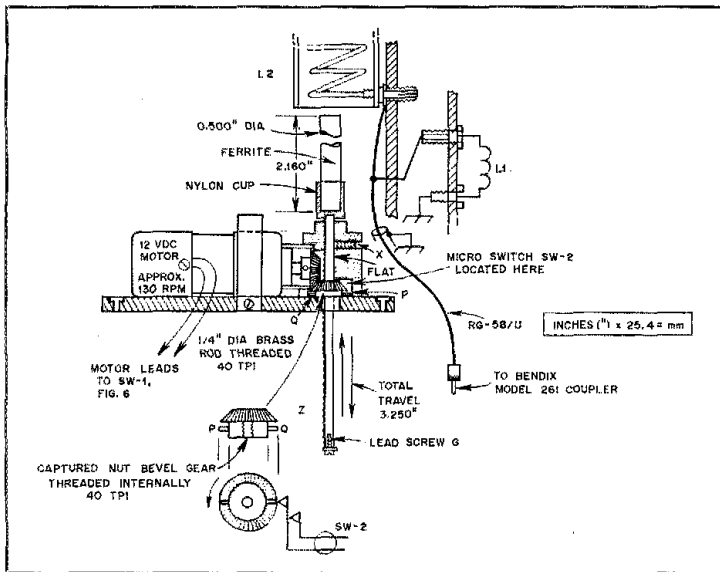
The remote variable-inductor drive assembly. Threaded drive rod G has a milled flat over its whole length; the rod is prevented from rotating by means of a set screw positioned against this flat at X. The hole in bevel gear Z is tapped for 1/4-40 threads per inch and mates with drive rod G. The motor-driven bevel gear drives the "captured nut" bevel gear Z, raising or lowering the ferrite rod inside L2. Projections P and Q on bevel gear Z activate switch S2 (see Fig. 6) twice per revolution. S2 will be activated for each 0.0125 in. (0.3 mm) of up or down travel of lead screw G. Two-conductor shielded cable is routed from S2 to the control center (see Fig. 6).
